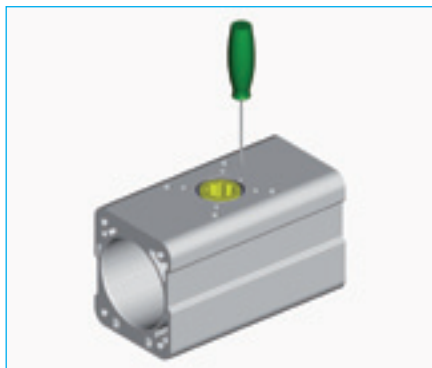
| Disassembly of the drive pinion actubar® Type AD/AS-004 to AD/AS-230
